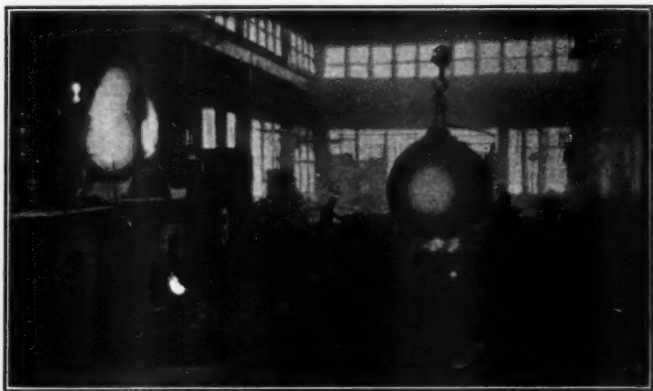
CARR'S DETACHABLE OPEN-HEARTH FURNACE. POURING POSITION.
